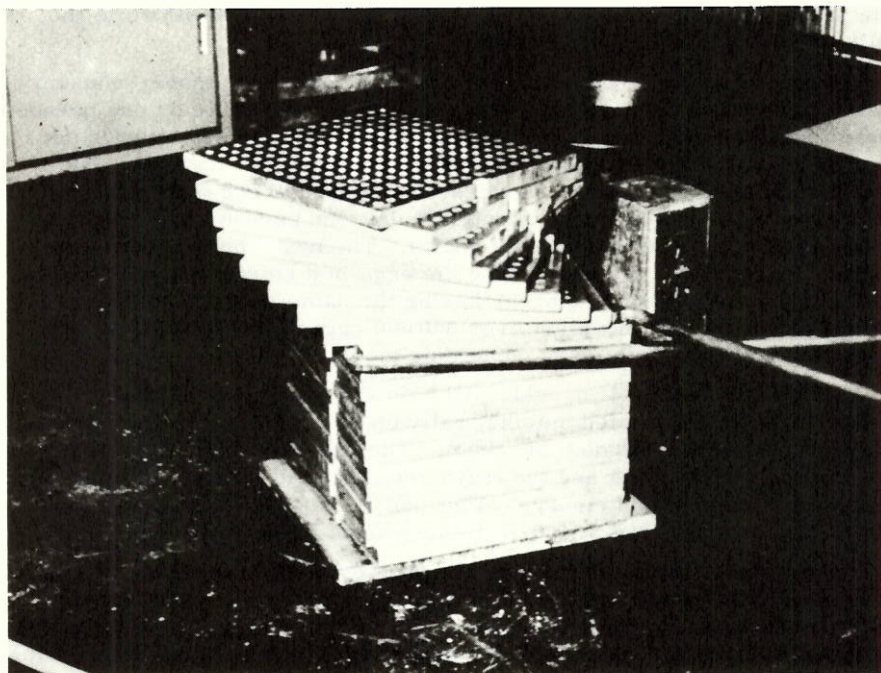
Stack of aluminium mould plates for making adult boll-weevil diet pellets.
